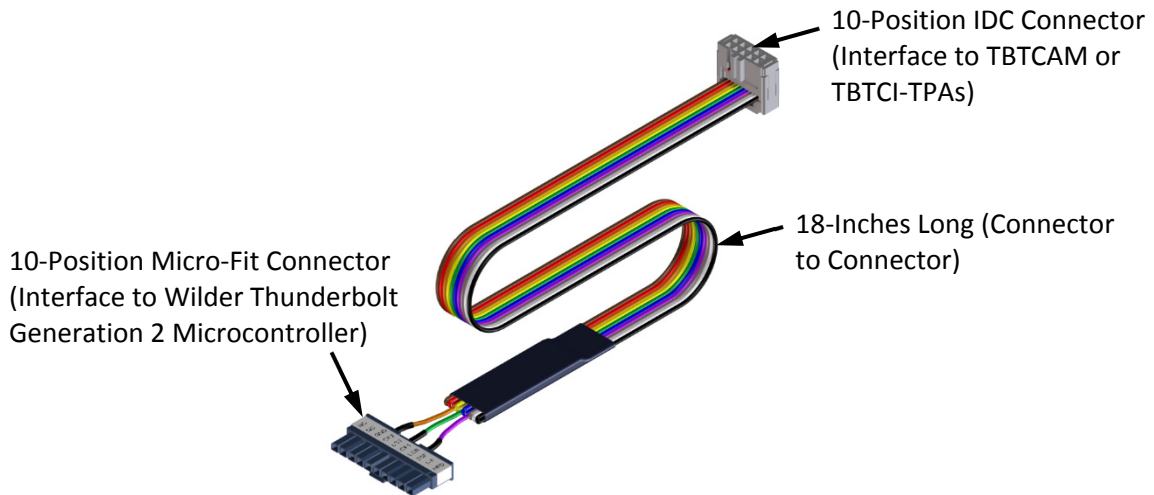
10-Position Ribbon Cable Assembly (Thunderbolt Testing)
